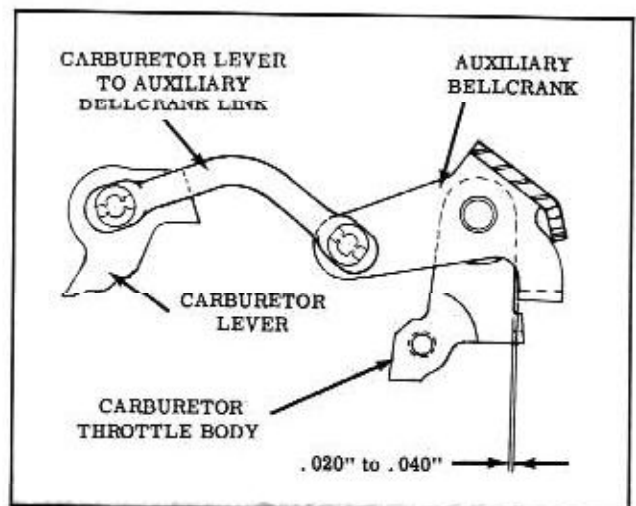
Checking 4GC Carburetor Link (SMT)
